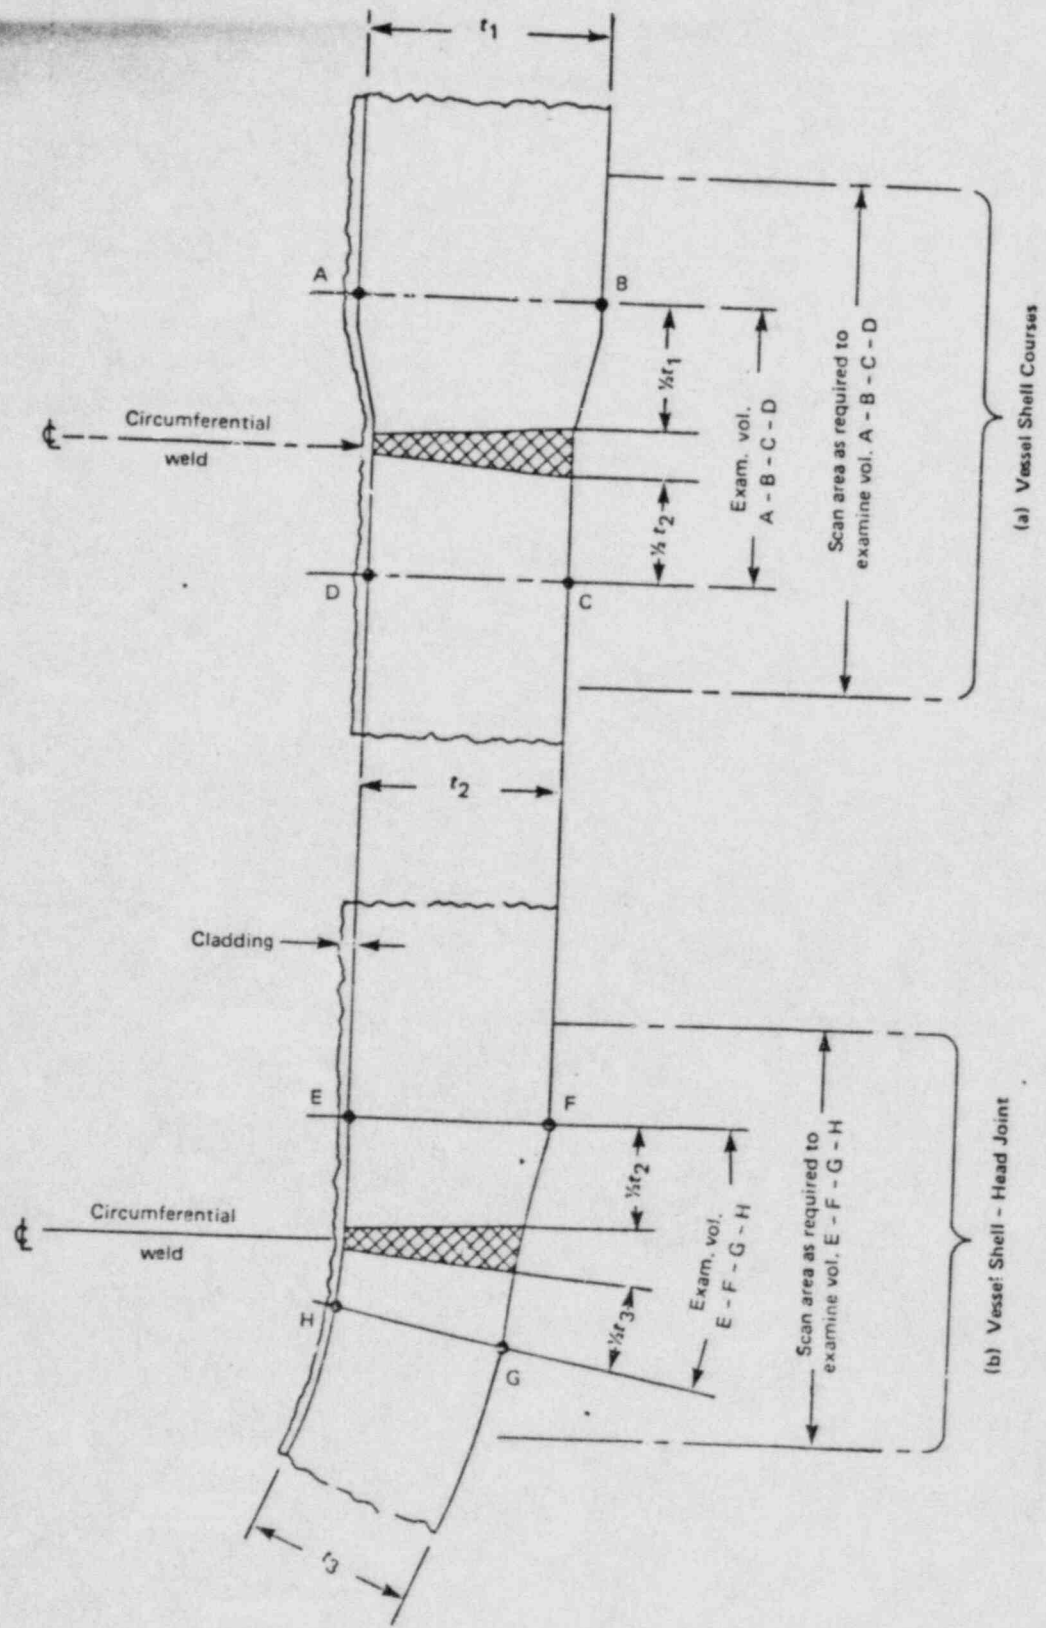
VESSEL SHELL CIRCUMFERENTIAL WELD JOINTS
